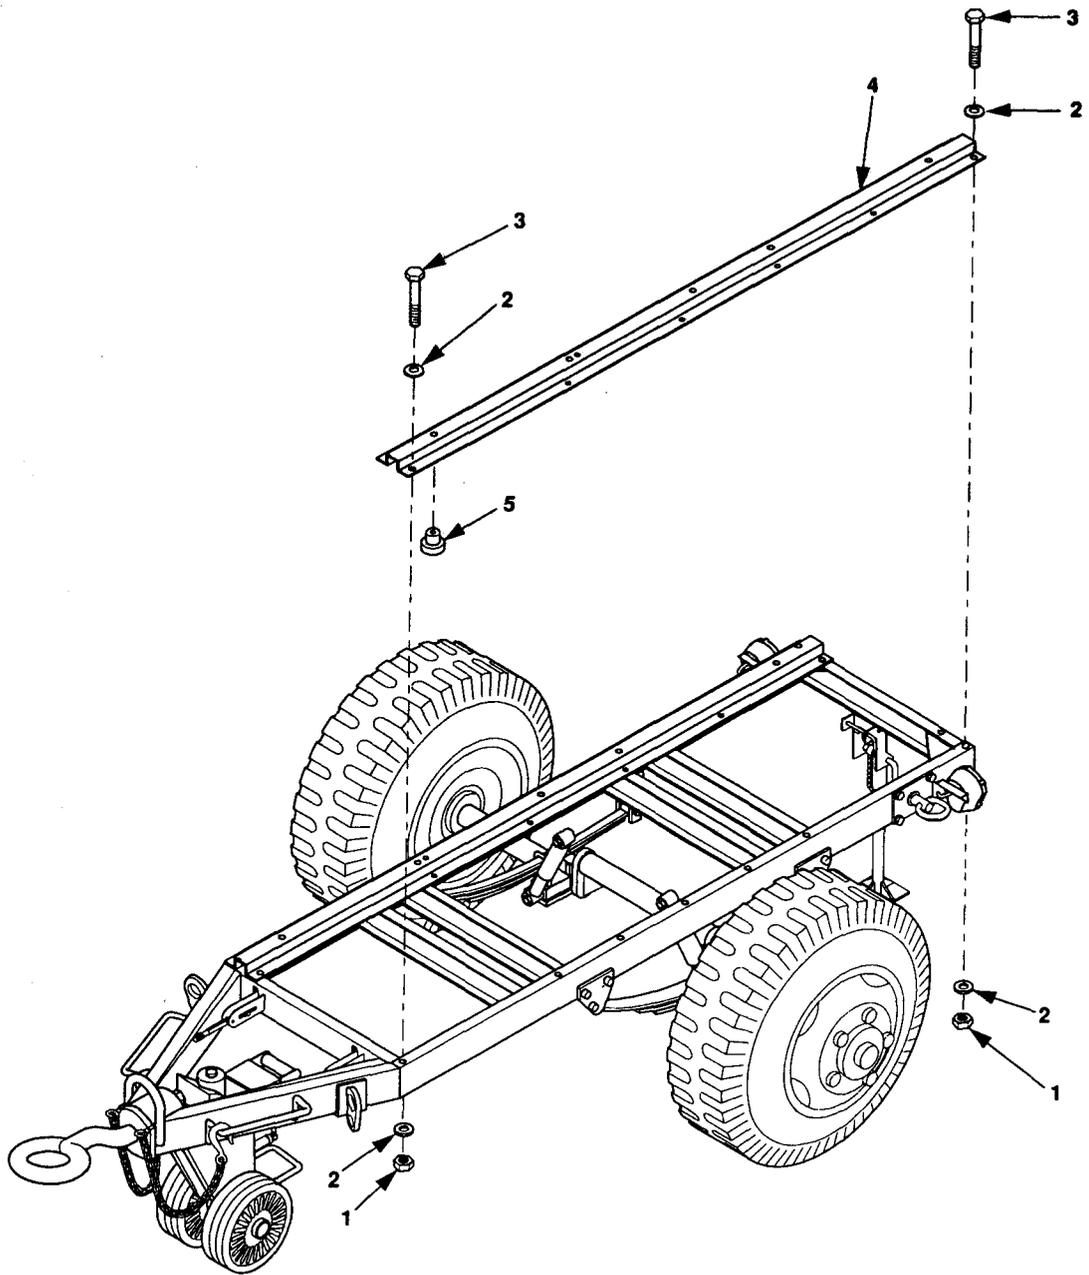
Replace AN/WJQ-36 Generator Mounting Rail.
